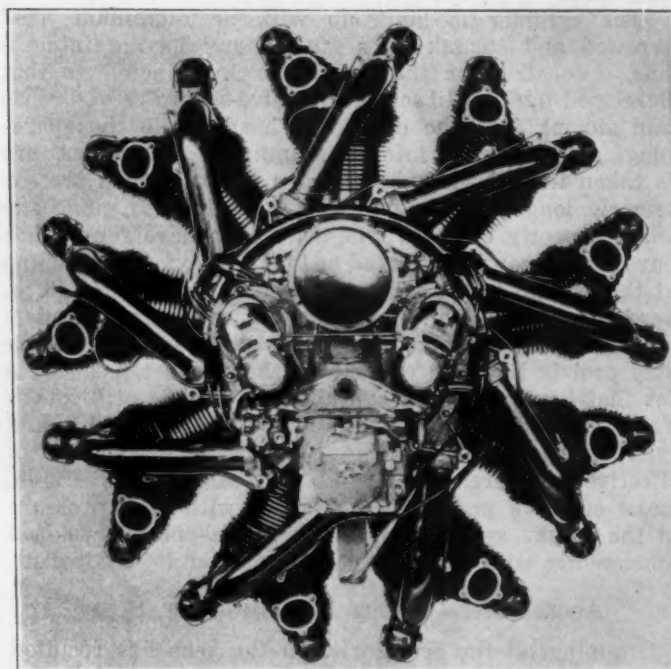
ACCESSORY END OF THE WASP ENGINE
